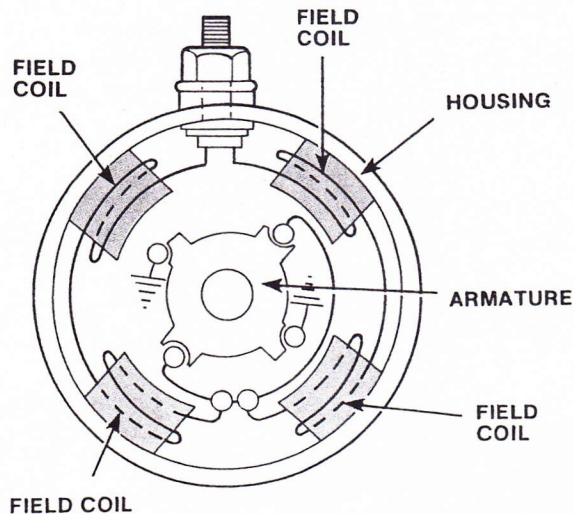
Cross-sectional view of a motor housing with field coils mounted to the inner housing walls.
